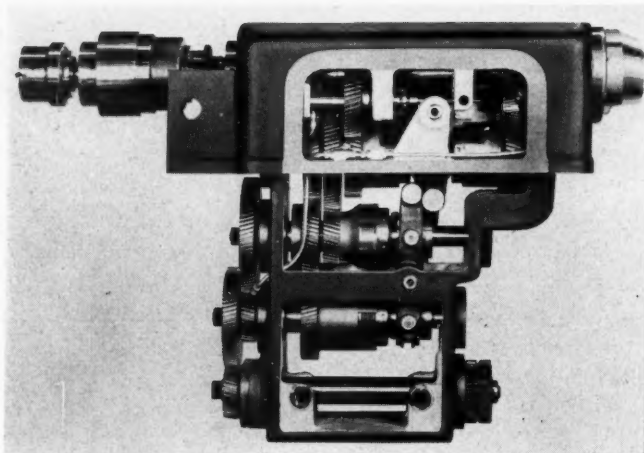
Cutaway view of spindle head showing gears for three speed ranges, obtained by changing sprockets on drive shaft and low spindle head shaft
